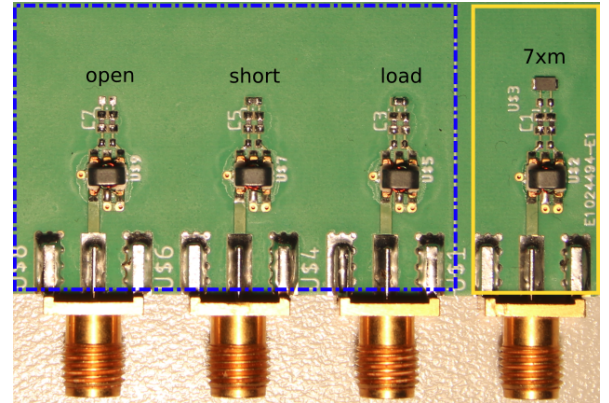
PCB test fixture and calibration kit using a transmission line transformer.
